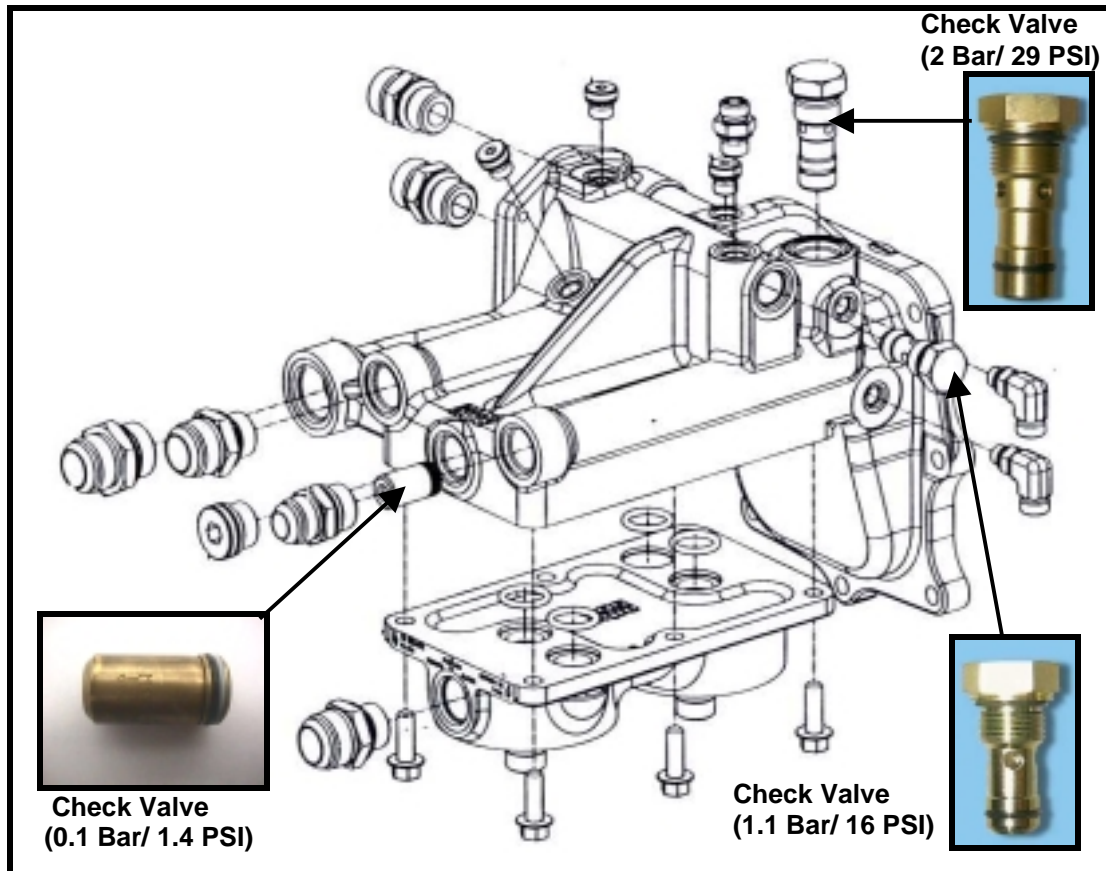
Fuel Junction Block Assembly with Check Valve Locations
